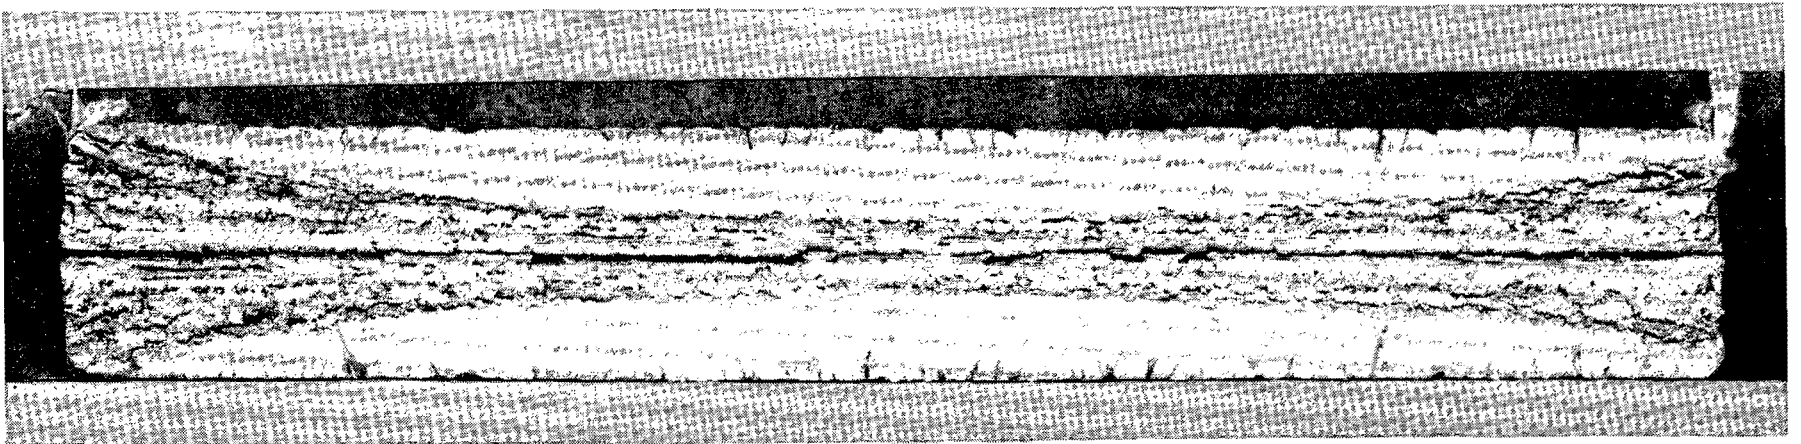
Fracture surface 16 mm specimen (scale 1:1).
